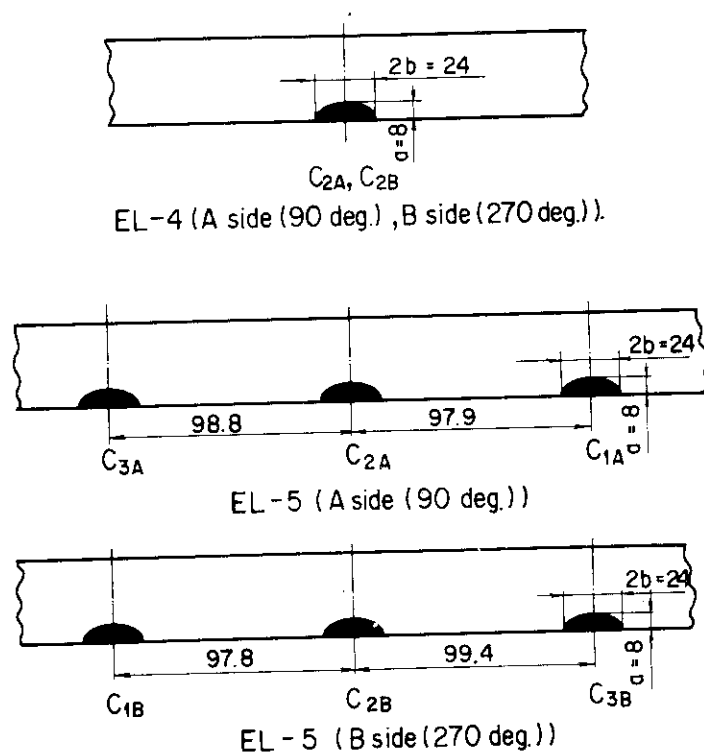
Geometry and location of initial defects(Electric Discharge Machining) of EL-4 and EL-5 test pipes
